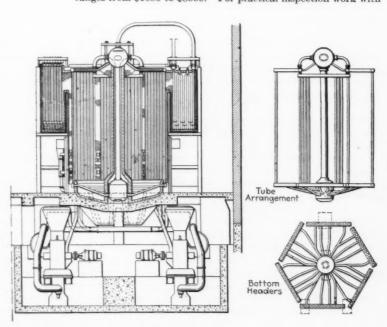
The Swedish Boiler Arranged for Pulverized Coal
